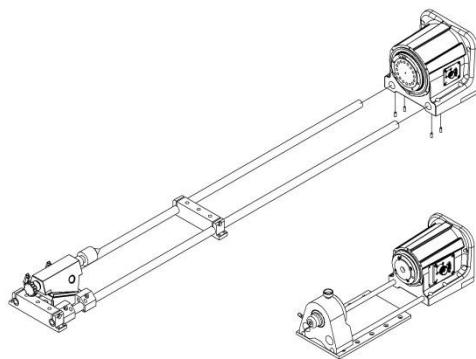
Dimension drawing rotation unit RDH-XS with tailstock unit RE XS
